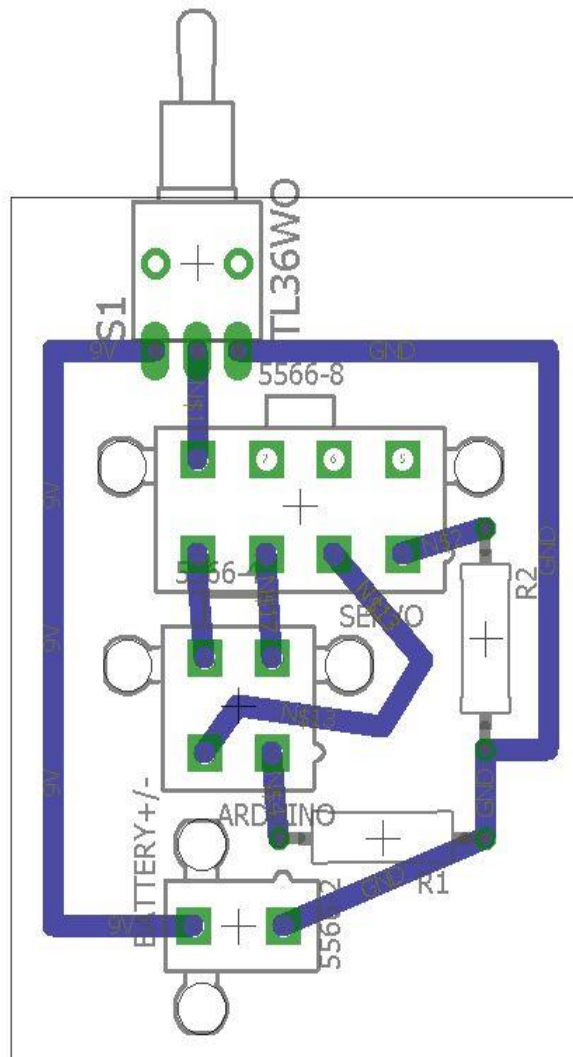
Board drawing of the PCB designed in EAGLE CAD.
